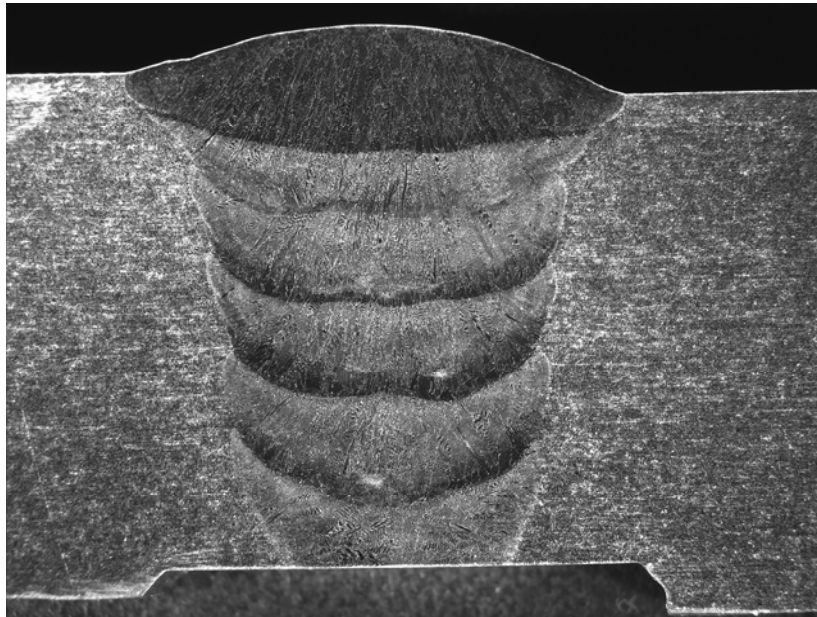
Etched cross-section of alloy 230 weld. Plate thickness is 19 mm
